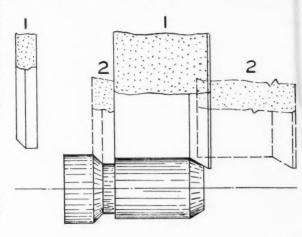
Two chamfers are ground by the use of the formed wheels shown in this drawing.
